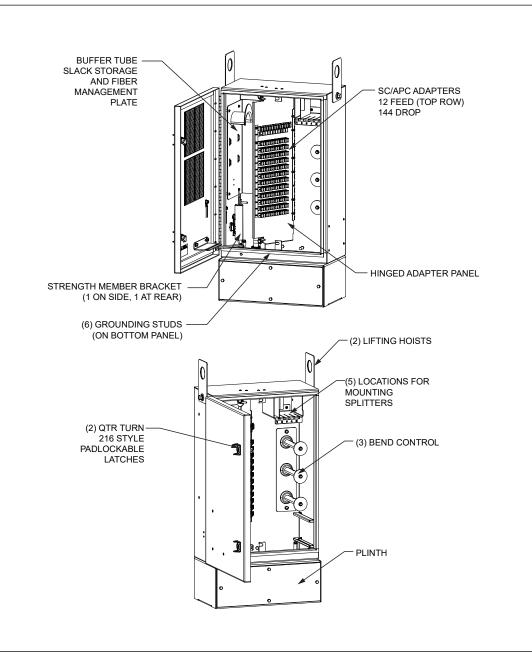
CFIT Components – Pad Mount Factory installed fiber cables not shown.
